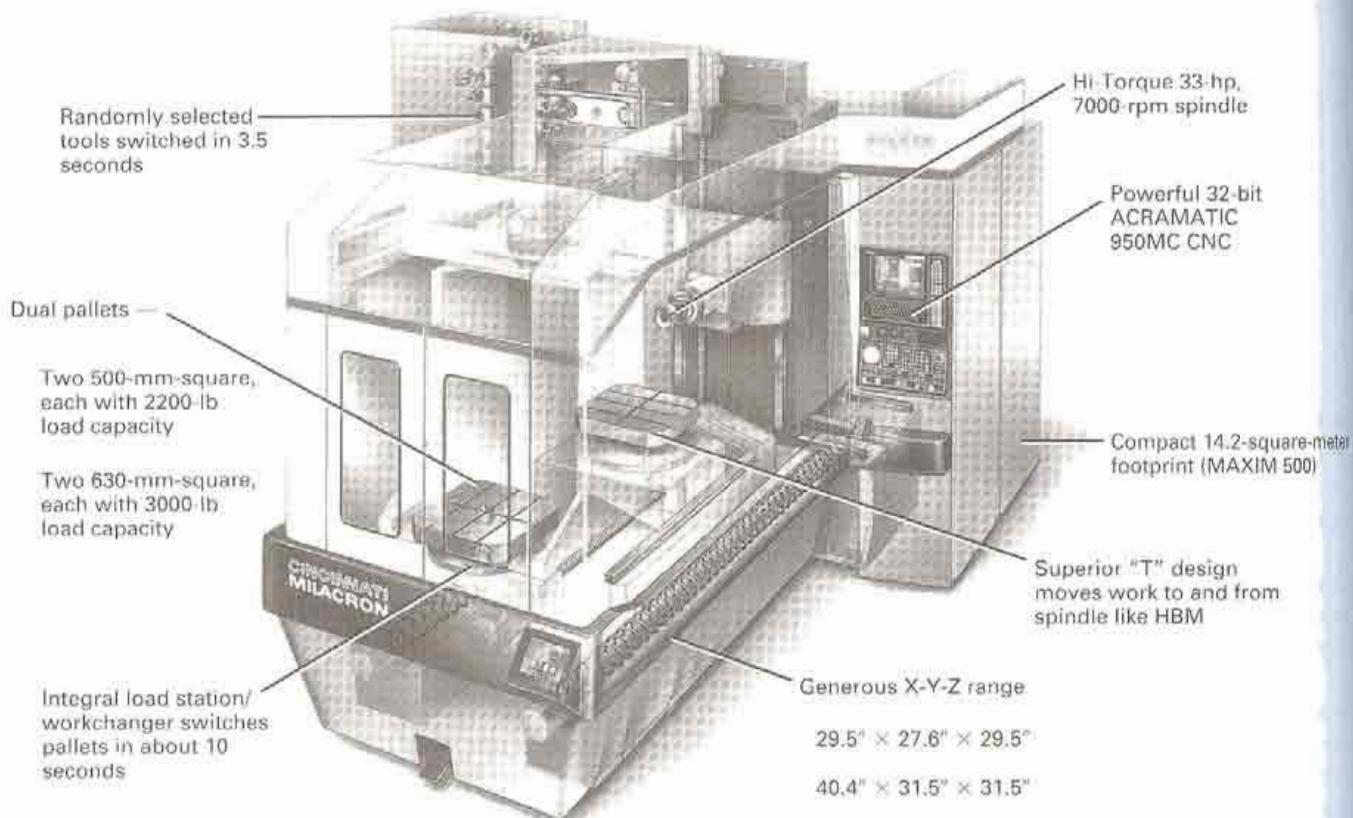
Modern machining centers will typically have horizontal spindles with rpms up to 15,000, dual pallets, and cutting-tool magazines holding 40 to 100 tools.
